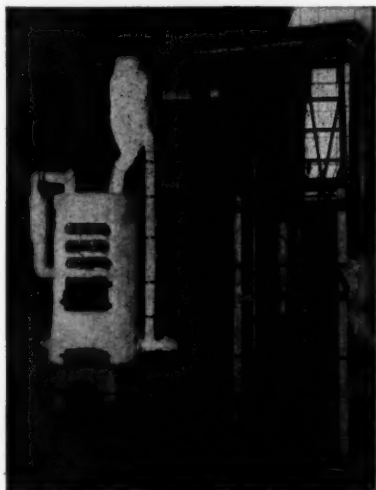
COMPLETE BOILER ASSEMBLED AS USED FOR NATURAL GAS TESTS
